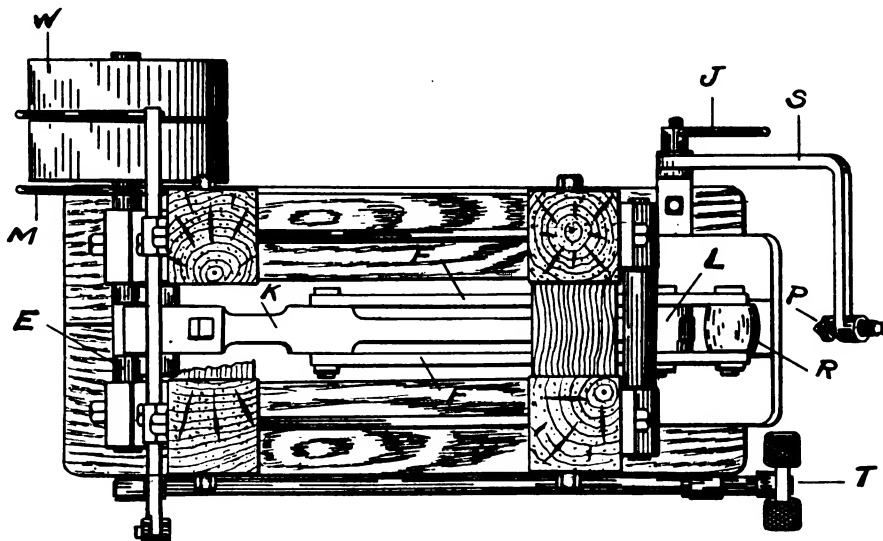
PLAN VIEW OF SHARPENER, SHOWING HEAVY CONSTRUCTION OF FRAME
